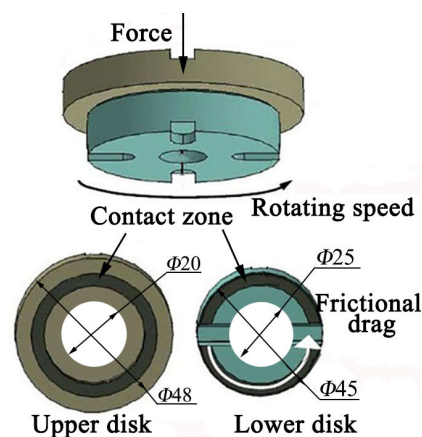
Schematic and dimensions of the ring–ring friction couples of wear tests.
